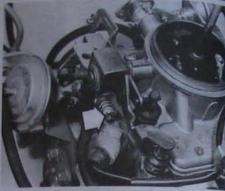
Checking the secondary fuel cut-off valve plunger clearance. Hitachi carburettor (Sec 13)
